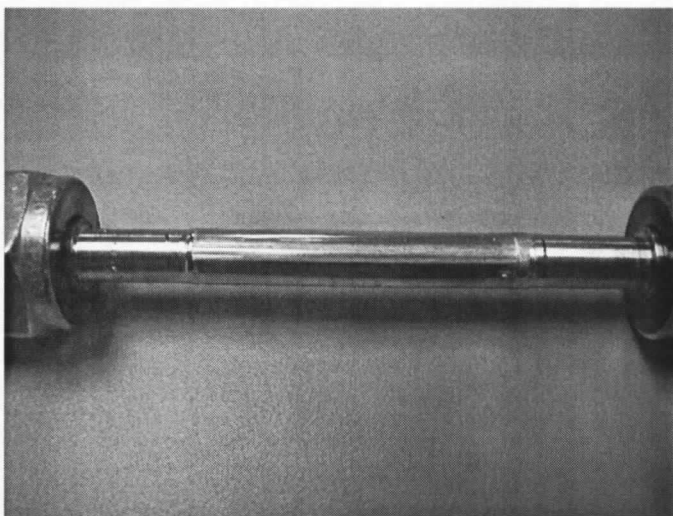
V–Cu foil welded into a 6 mm diameter tube and brazed to stainless steel VCR fittings.
